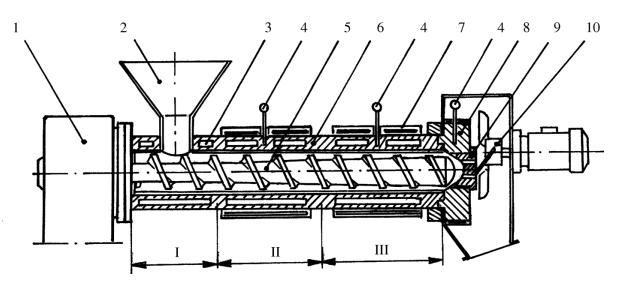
A cross-section of a single-screw food extruder: 1 - motor, 2 - feeder, 3 - cooling jacket, 4 - thermocouple, 5 - screw, 6 - barrel, 7 - heating jacket, 8 - head, 9 - dies, 10 - cutter, I - transport section, II - compression section, III -melting and plasticizing section (Mościcki & Van Zuilichem, 2011)
